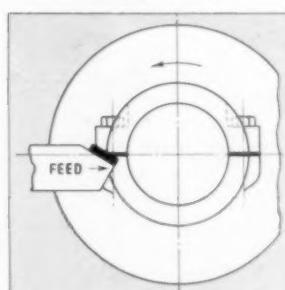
Same part as Fig. 10, but faced with shear-angle tool. Cross feed.
